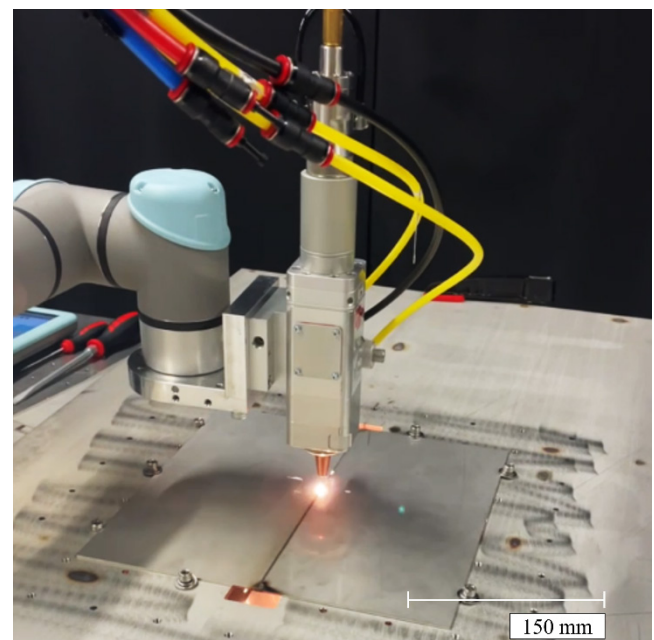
Universal Robots UR5e with LaserMech FiberMini II during seam butt joint laser welding of AISI 304 (EN 1.4301) stainless steel
